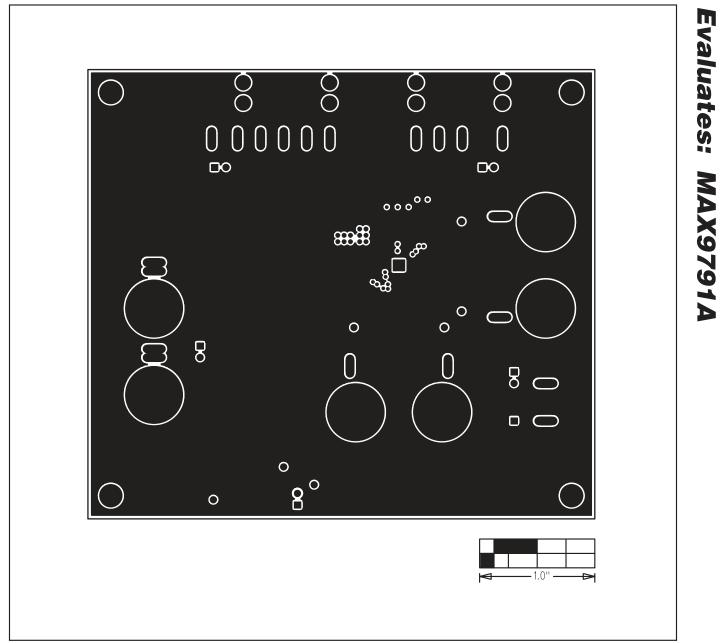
MAX9791A EV Kit PCB Layout—Layer 2
